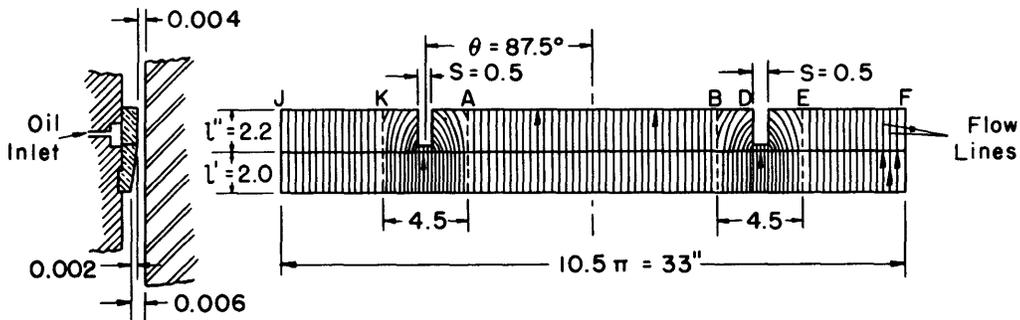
Diagram showing Section through Bearing Liner and Development of Clearance Space
